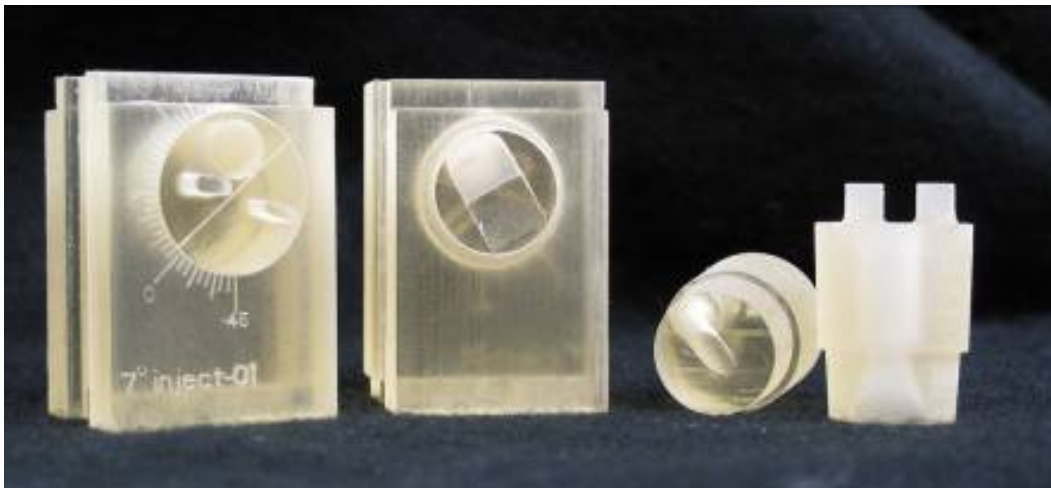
Pieces for injection nozzle testing driven by an external air supply.
